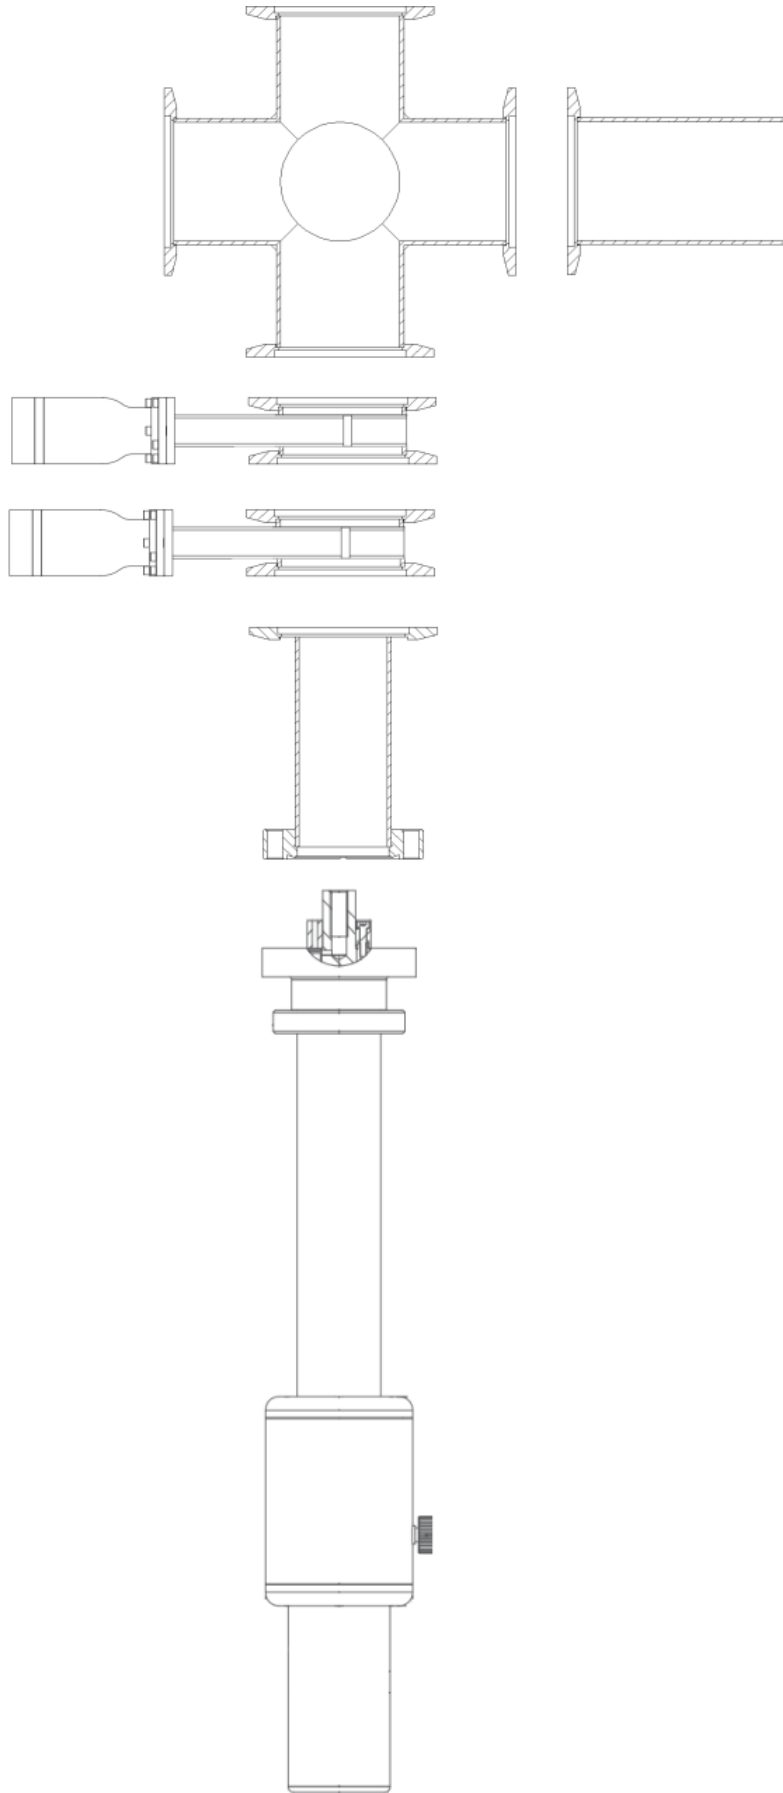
Final Design CAD drawing using part DXF files from Kurt J. Lesker
